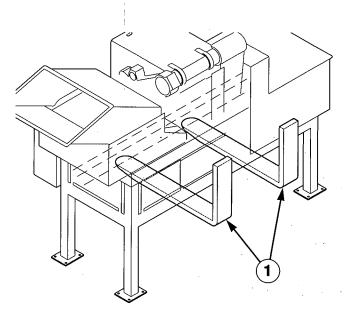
Always use frame to lift or move machine. (1) Lifting Forks.
